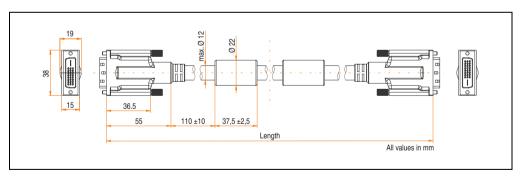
Dimensions - SDL flex cable 5CASDL.0xxx-03
